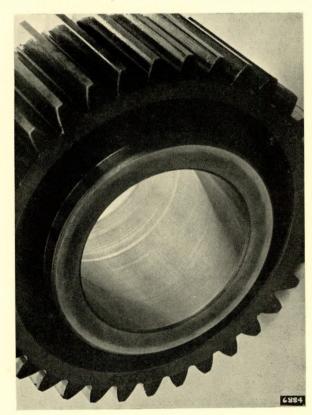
Turbo-generator gearing in s.s. Neleus: planet wheel of second train showing bore and teeth
